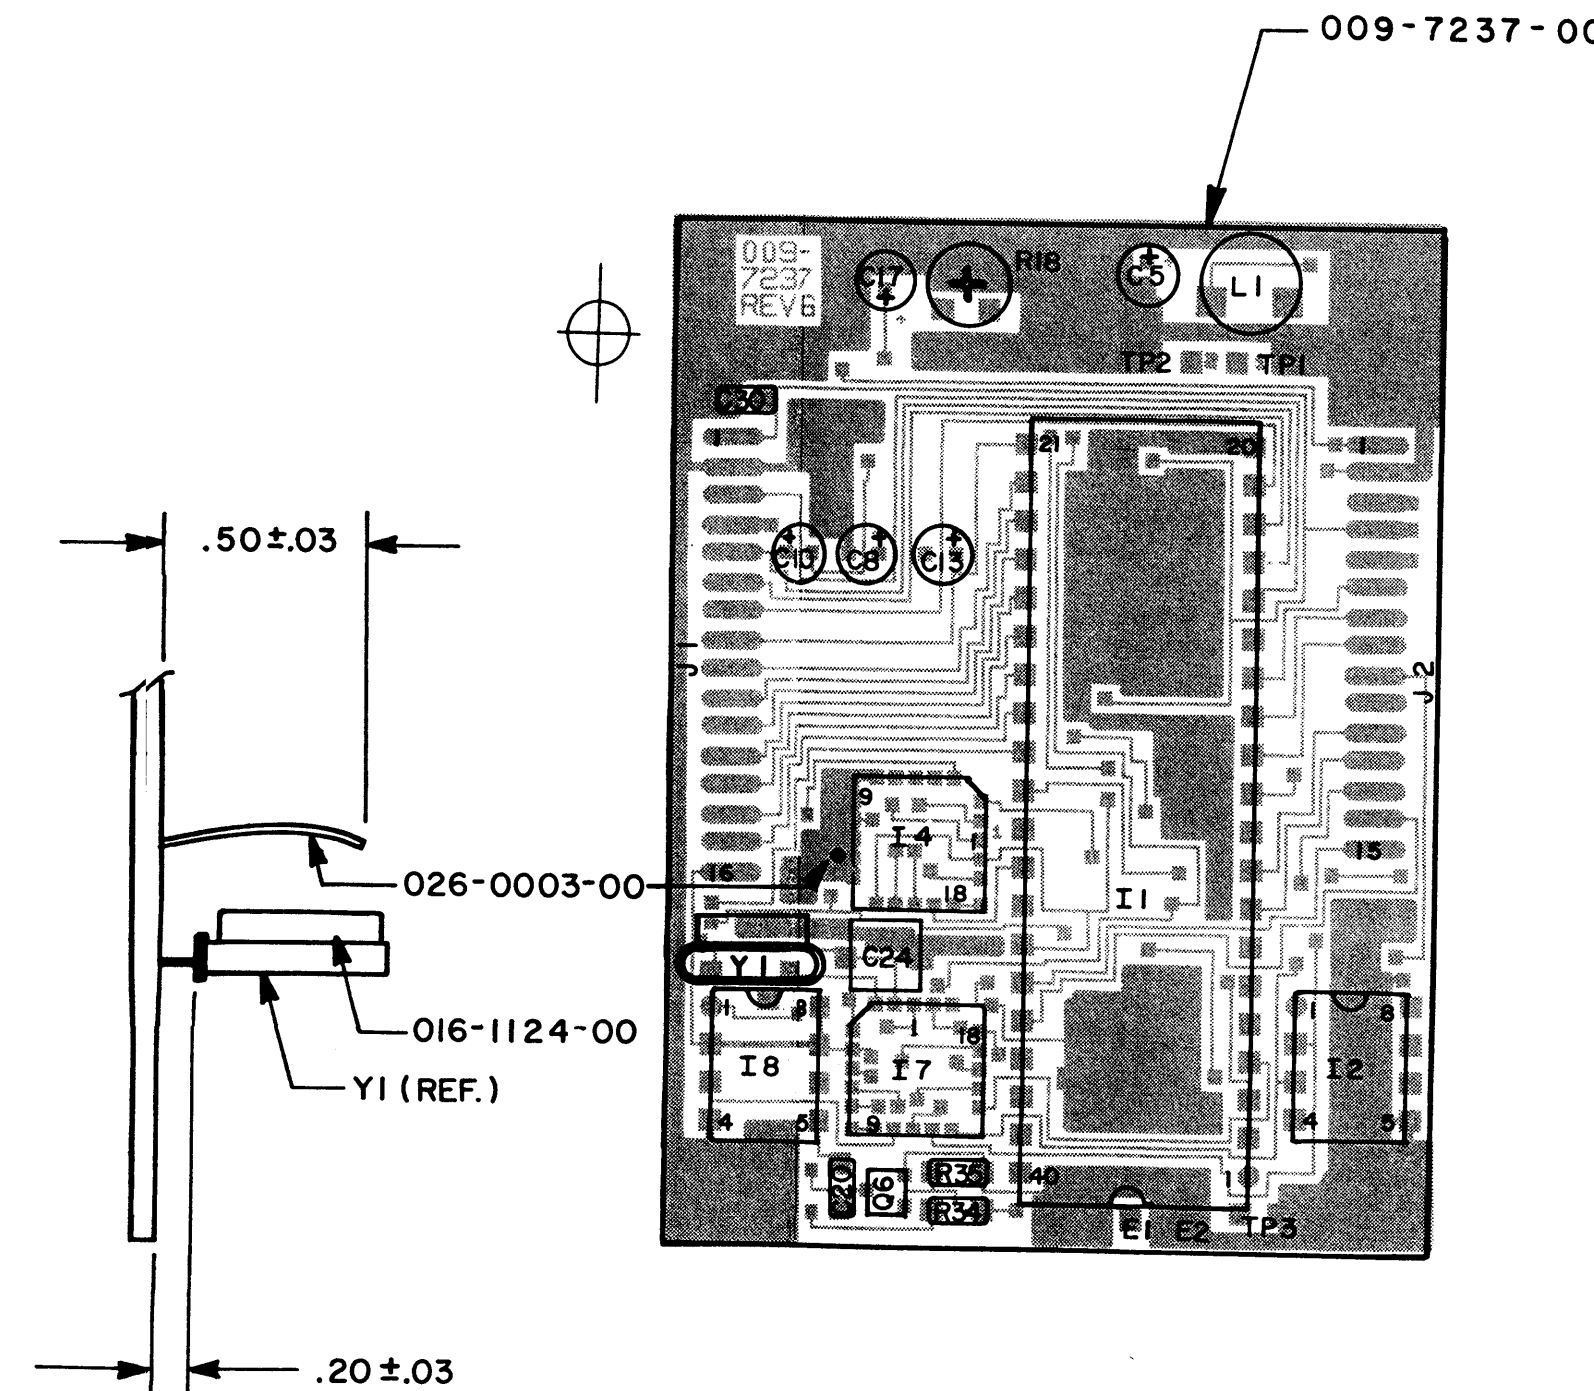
VOR/MICROPROCESSOR BOARD ASSEMBLY
